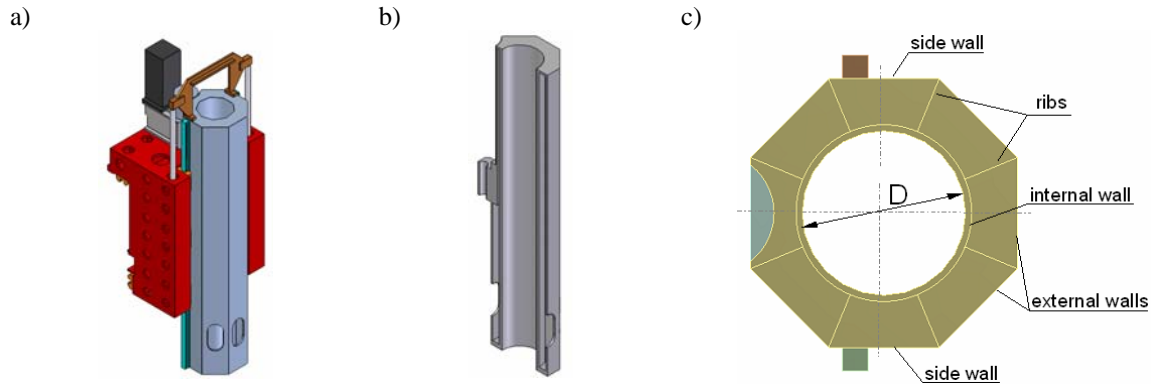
The geometrical shape of movable subassemblies of planer mill HSM 180 [1]: a) the saddle with the slide, b) the slide in longitudinal section, c) the elements of slide geometry to parameters optimization process
